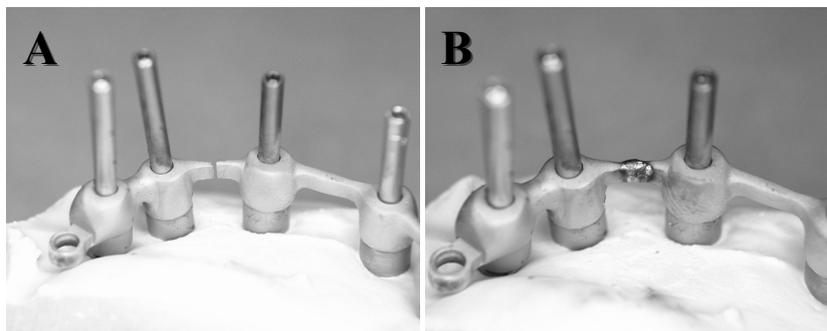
Metal framework for implant supported superstructure screwed onto implant analogs of the master cast before (A) and after (B) laser welding.
